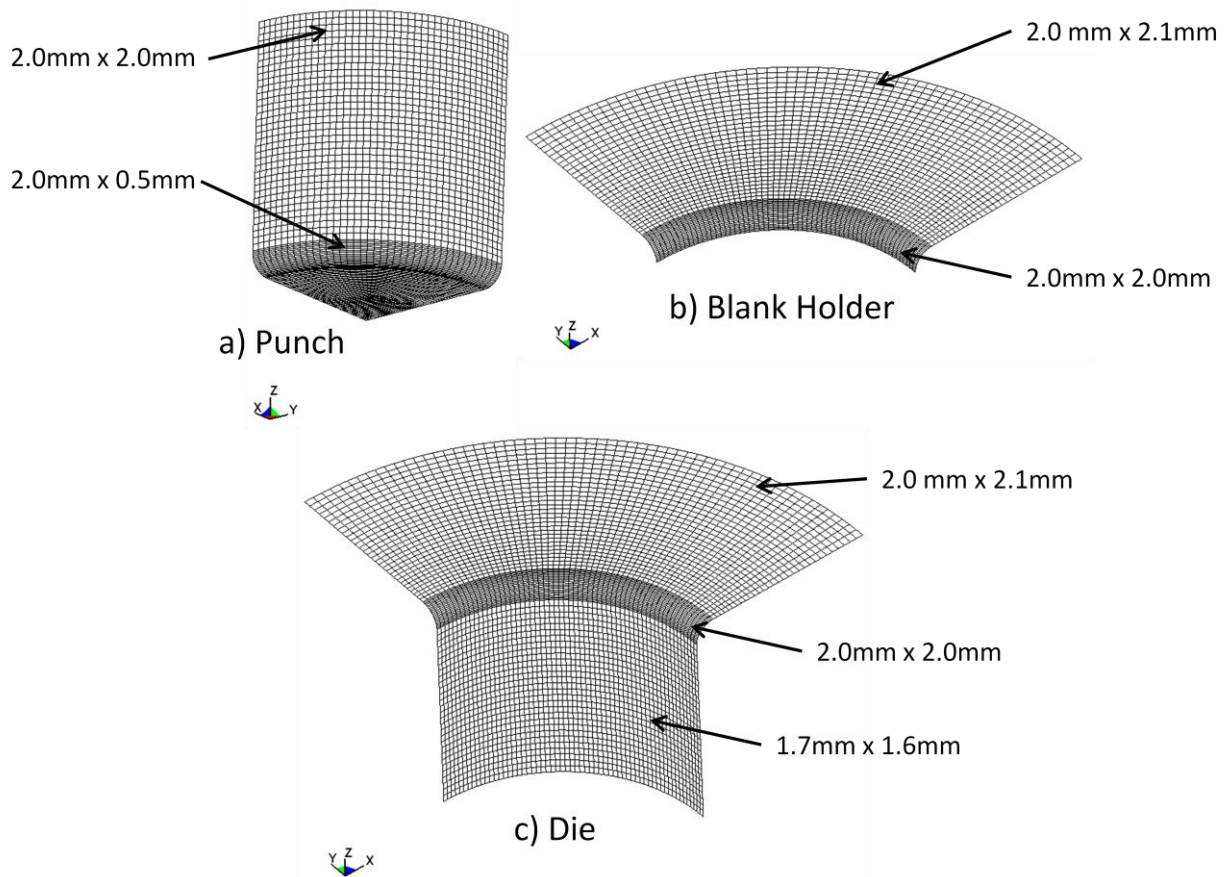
Deep drawing tooling mesh used in FE simulations.
